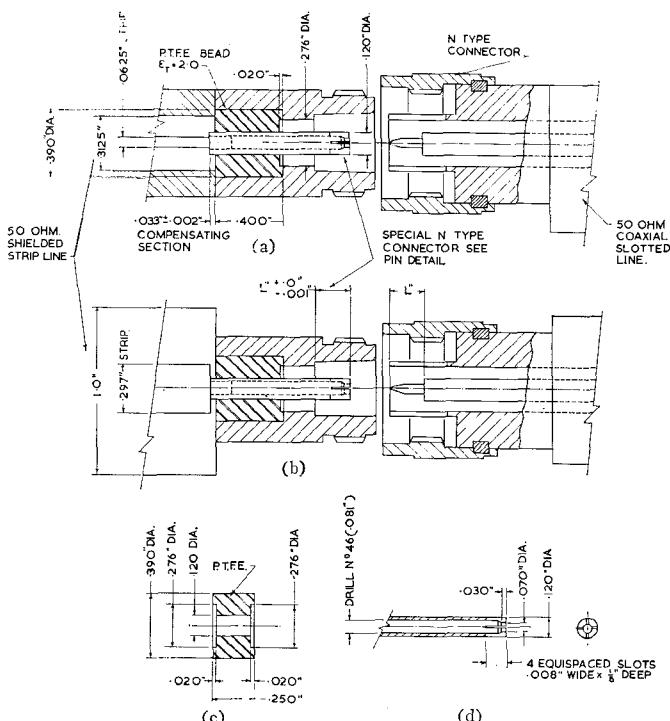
Details of the compensated coaxial-to-shielded stripline butt transition mated to a coaxial slotted line. (a) Elevation. (b) Plan. (c) Standard 50-ohm air coaxial line support bead. (d) Pin detail.
